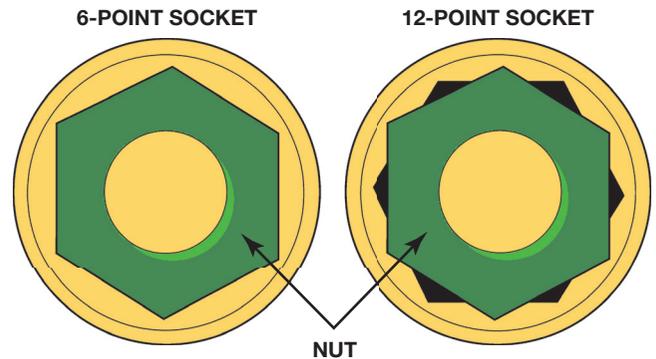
A 6-point socket fits the head of a bolt or nut on all sides. A 12-point socket can round off the head of a bolt or nut if a lot of force is applied.
